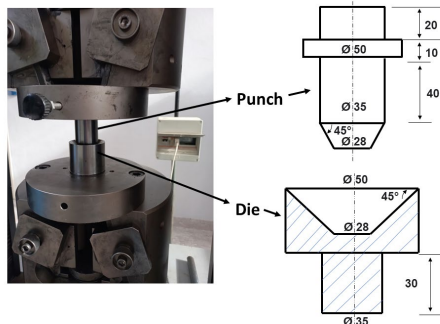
Forging tool and die setup integrated with Galdabini tensile testing machine
